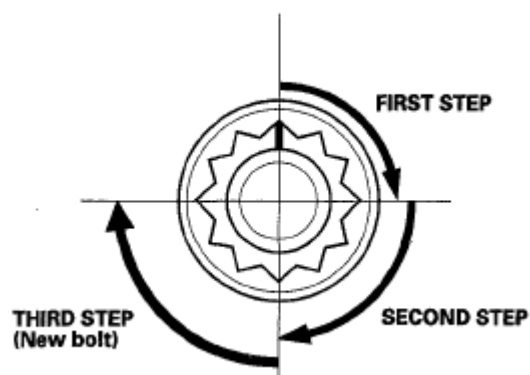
Identifying Cylinder Head Bolts Tightening Angle
